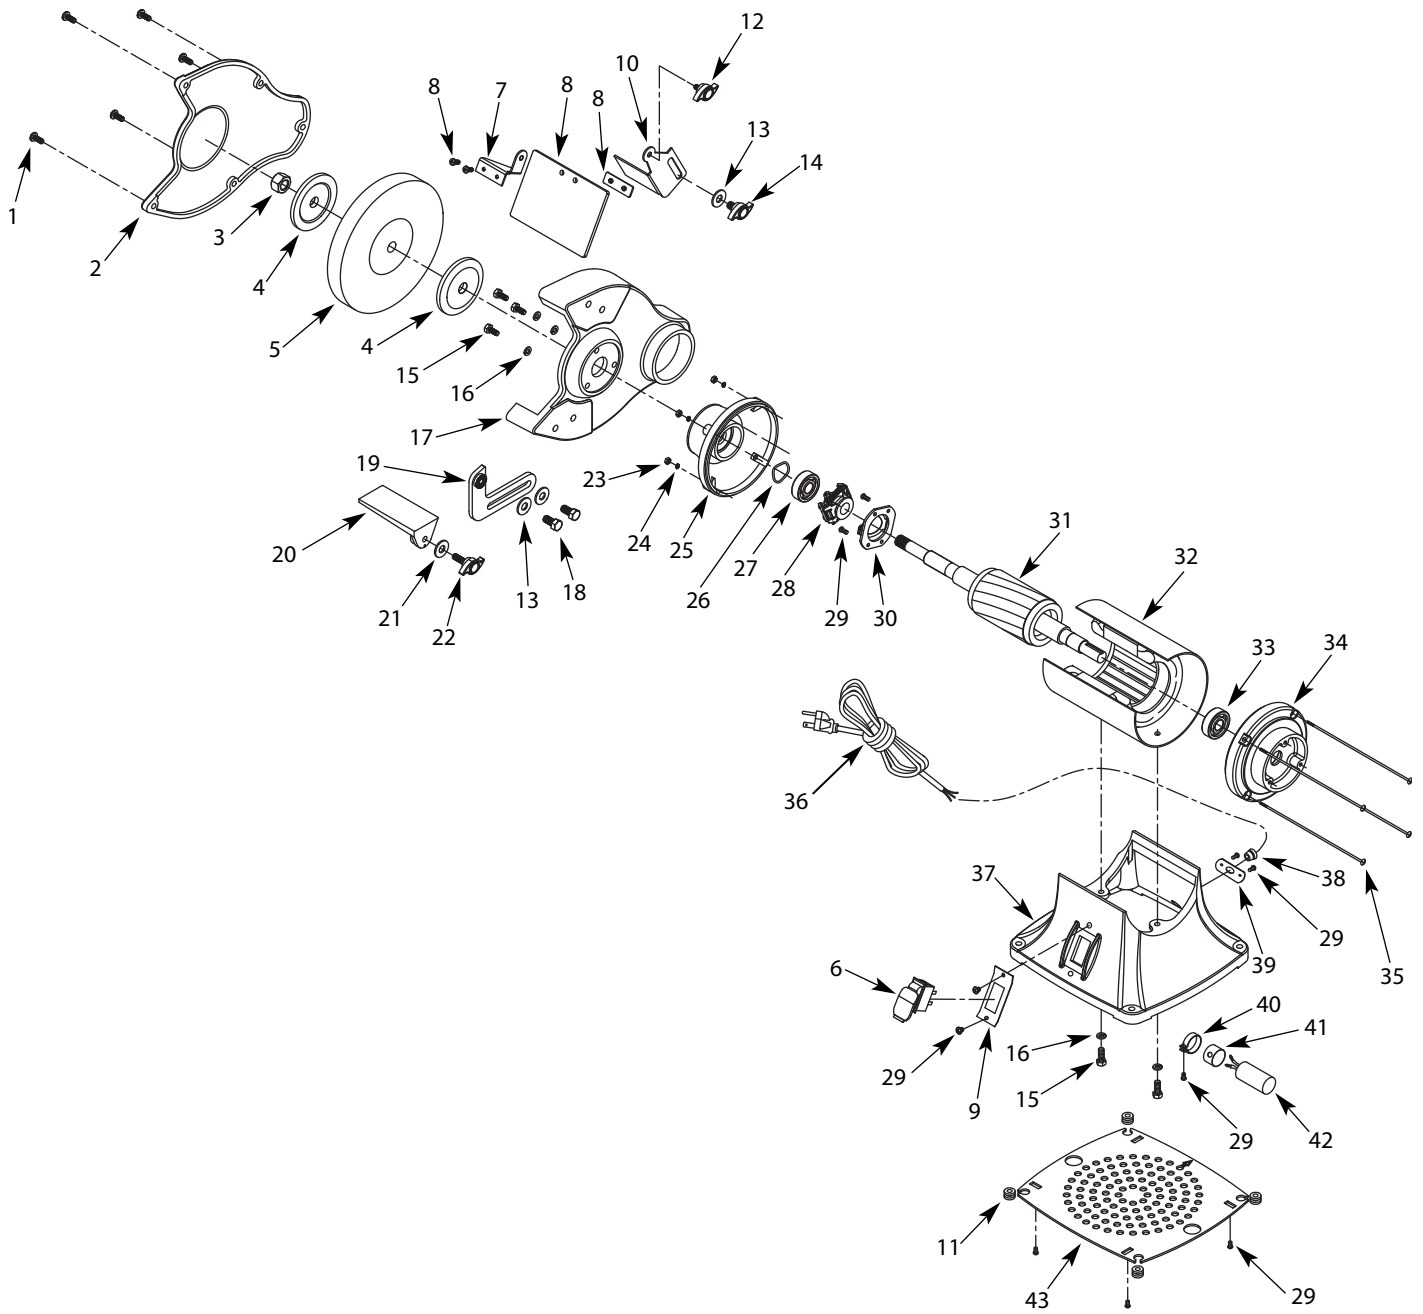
Repair Parts Illustration for Grinding Wheel and Motor
